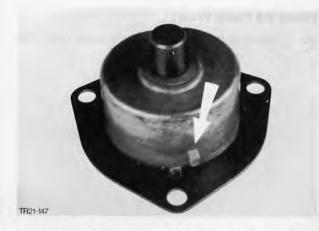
Slide oil pump retainer plate behind pump housing lug
